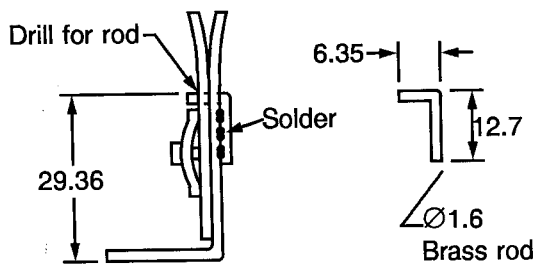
FIGURE V - TEST FIXTURE TF-C, TF-D AND TF-E (FOR RADIAL LEADS)
